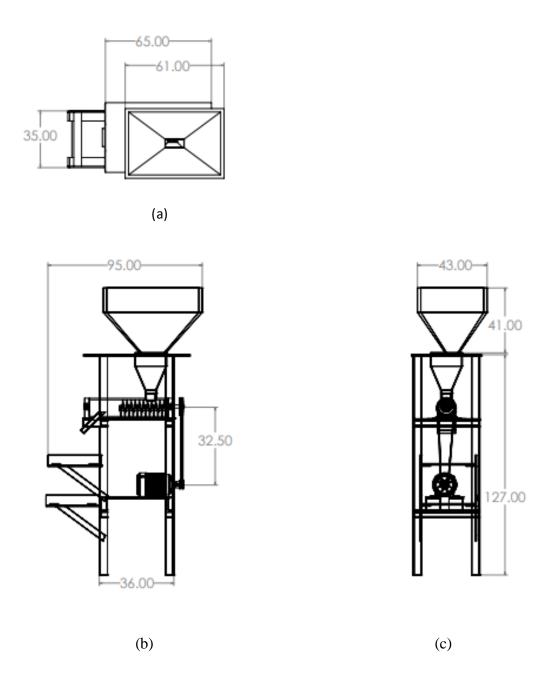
Model of growbag filling unit (a) Top view, (b) Front view and (c) Side view
